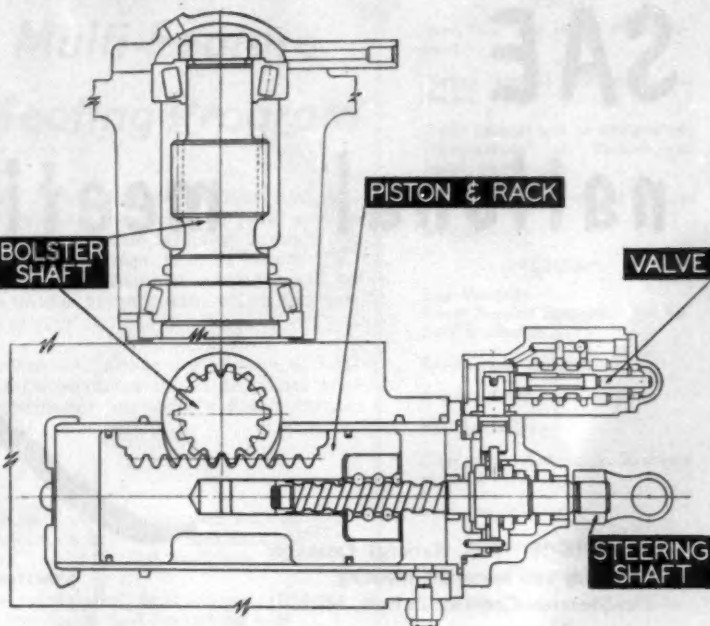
New power steering unit used on IHC F-460 and F-560 tractors.
